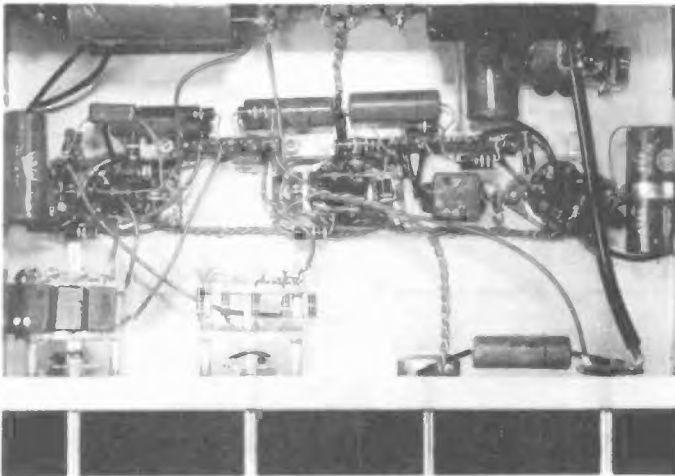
Above, left, bottom view of the preamplifier with the base plate removed to show layout of parts and wiring. Fig. 8. Above, right, bottom view of power amplifier with base plate removed.
